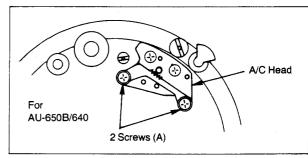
(1) A/C Head Unit (For AU-650B/640)
